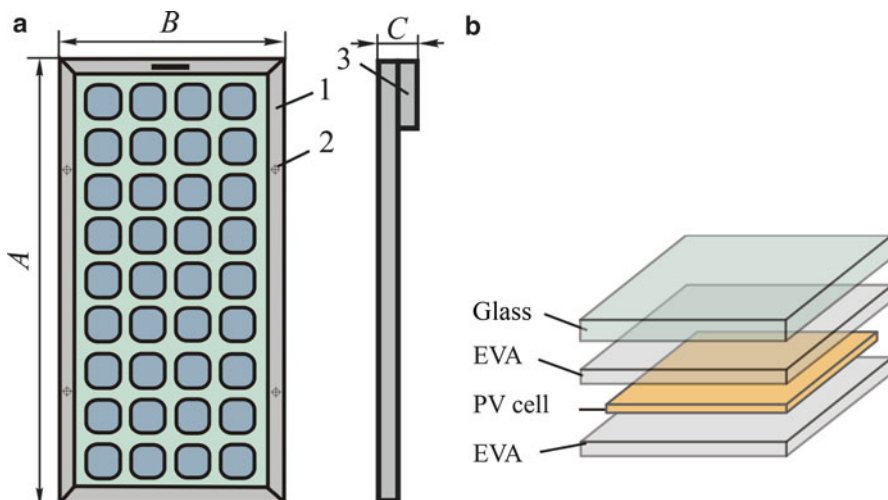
Design of PV module (a) and PV cell package (b): 1 – support; 2 – panel assembly holes; 3 – terminal box
